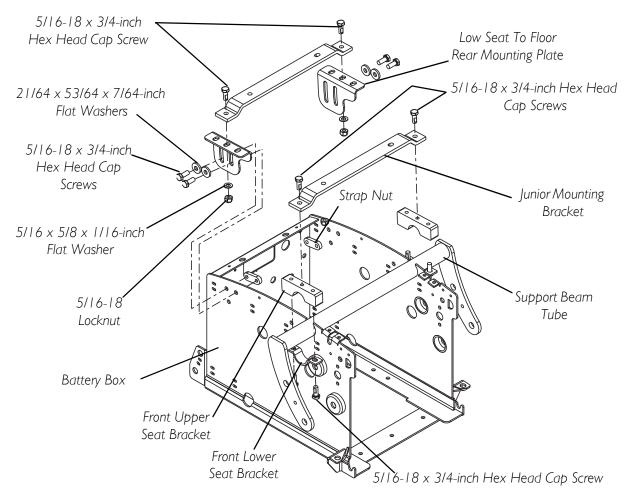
REMOVING/INSTALLING SEAT FRAME MOUNTING HARDWARE - LOW SEAT TO FLOOR HEIGHT
